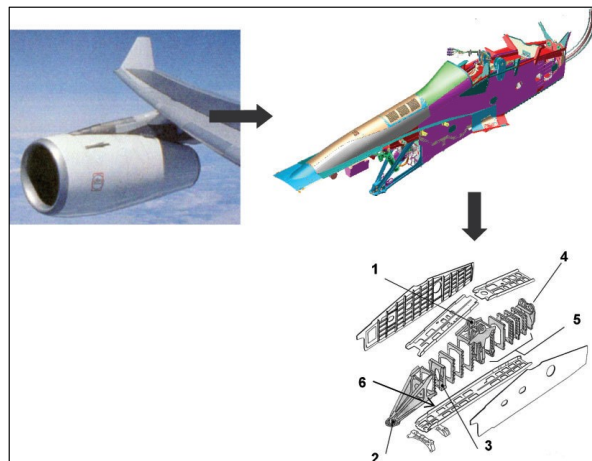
Components with AMS5659 15-5 PH stainless steels 1: out fit rib; 2: engine front suspension; 3: rib; 4: engine back suspension; 5: plain ribs; 6: lower spar.[3]
